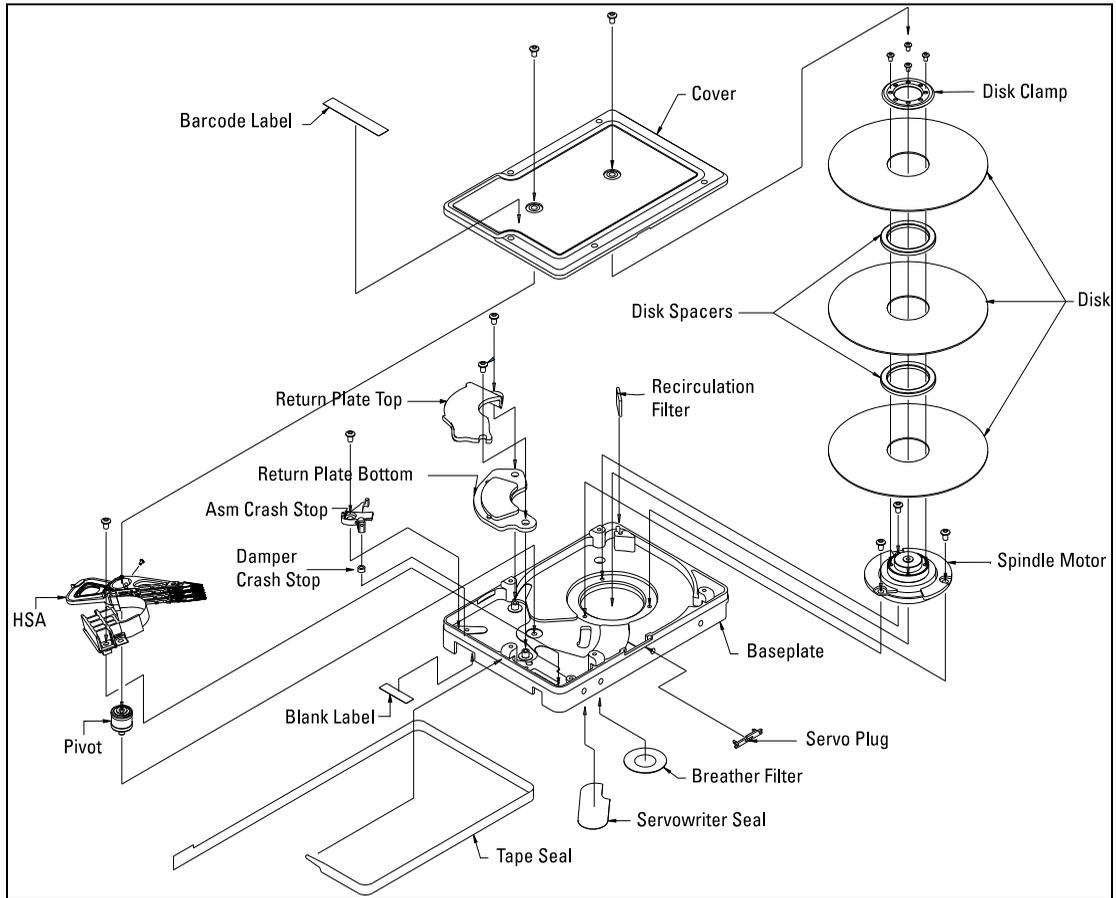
Caviar AC32100 and AC32500 HDA Assembly Drawing
